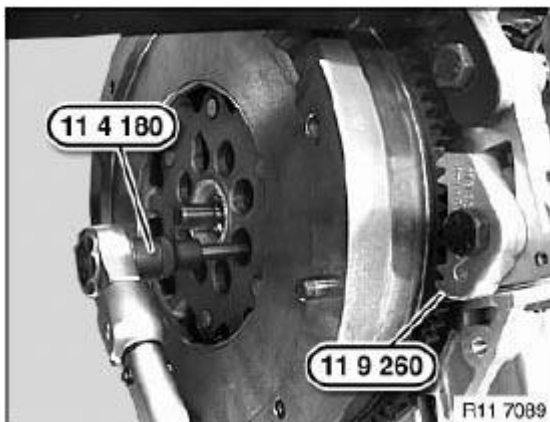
Removing Flywheel Bolts Using Special Tool 11 4 180
